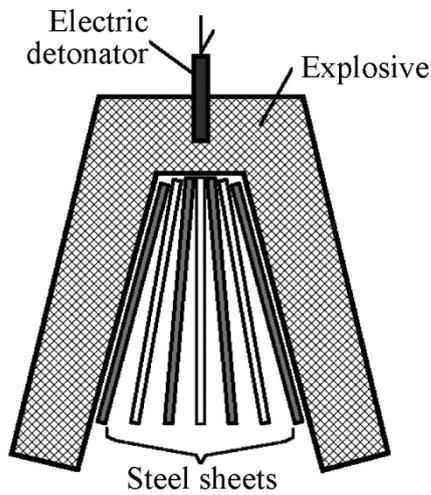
Schematic formation of the laminated composite by explosive welding
